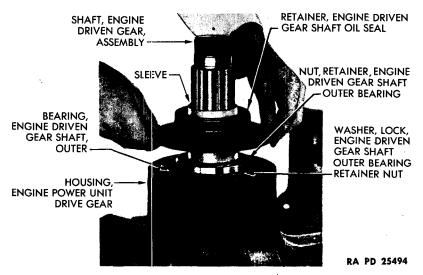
Installing Engine Driven Gear Shaft Oil Seal Retainer
